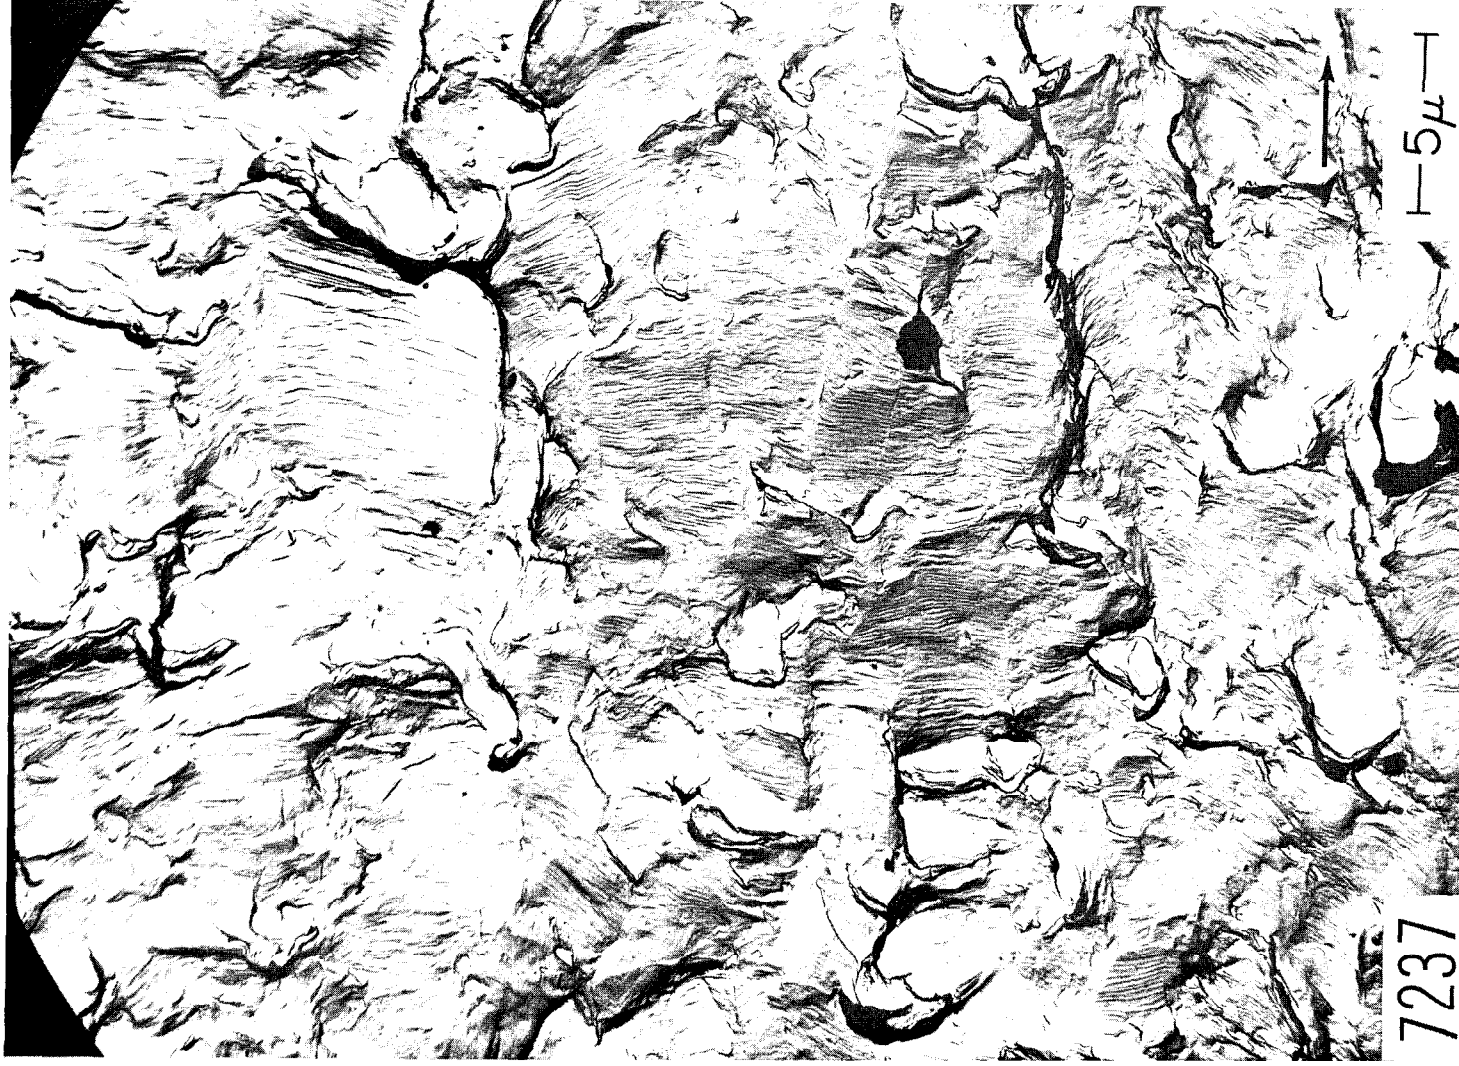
Fatigue markings in the RW crack shown in the specimen in Fig. 62. Cellulose acetate-carbon replication technique. Palladium shadowed. 6000X.
